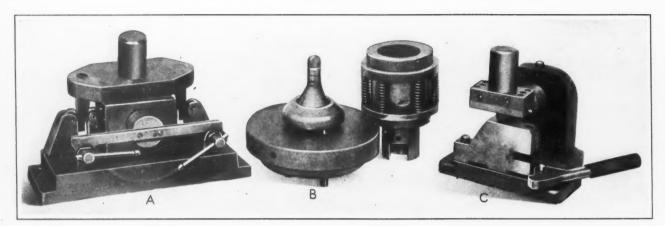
(A) Die for flattening Sides of Head; (B) Die that removes Bulge formed by Die shown at A; (C) Bolt-hole Perforating Die
